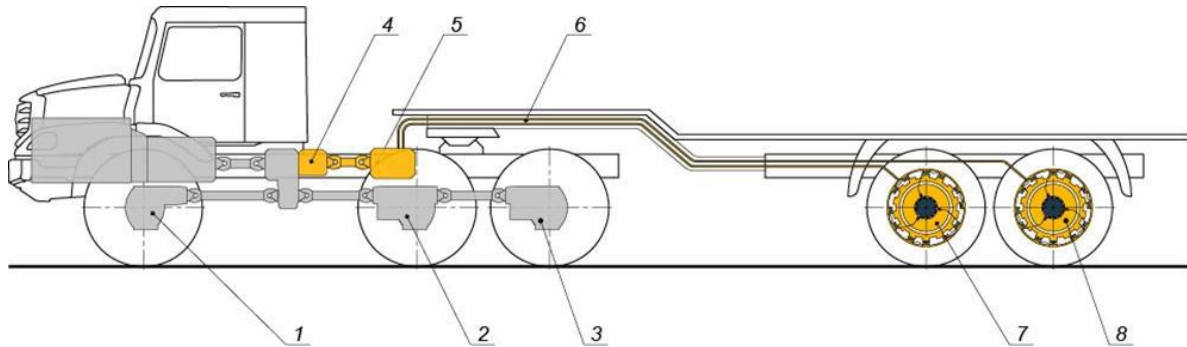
Layout of electrical drive units of the semi-trailer: 1, 2, 3 - leading axles of the tractor; 4 - power take-off box; 5 - generator; 6 - power wires; 7, 8 - electrical motor-wheel.
